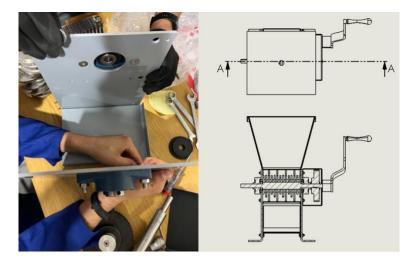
Side plate assembly and Technical drawing of the inside of Shredder.
